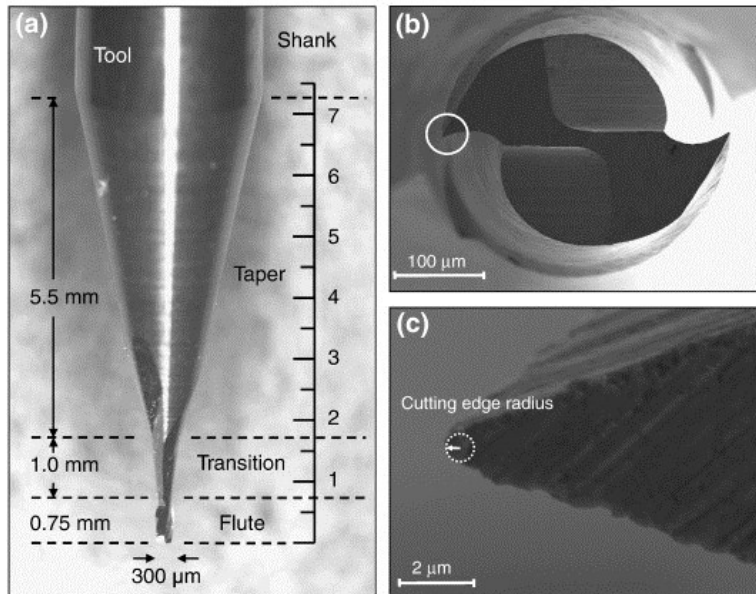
Micro end mill tool images: (a) optical image showing all sections of a tool, (b) SEM image of the cutting end of an end mill, and (c) SEM image of a corner of the tool. [Reprinted from [112], with permission from Elsevier]
